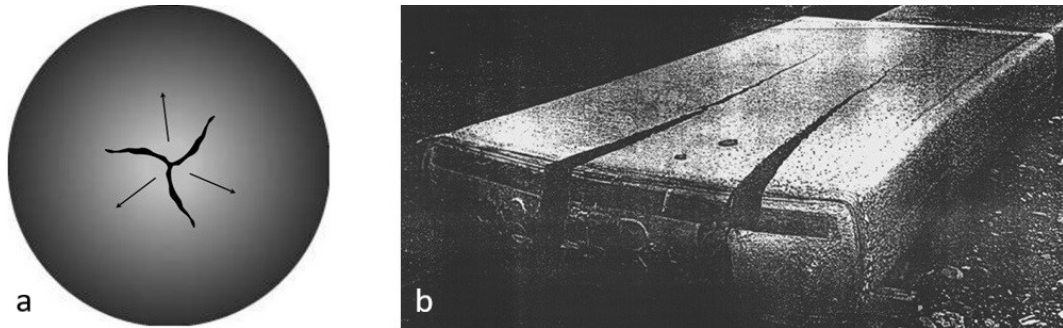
Examples of hot tearing in aluminum alloys; (a) extruded billet, (b) rectangular ingot [25, 26].
